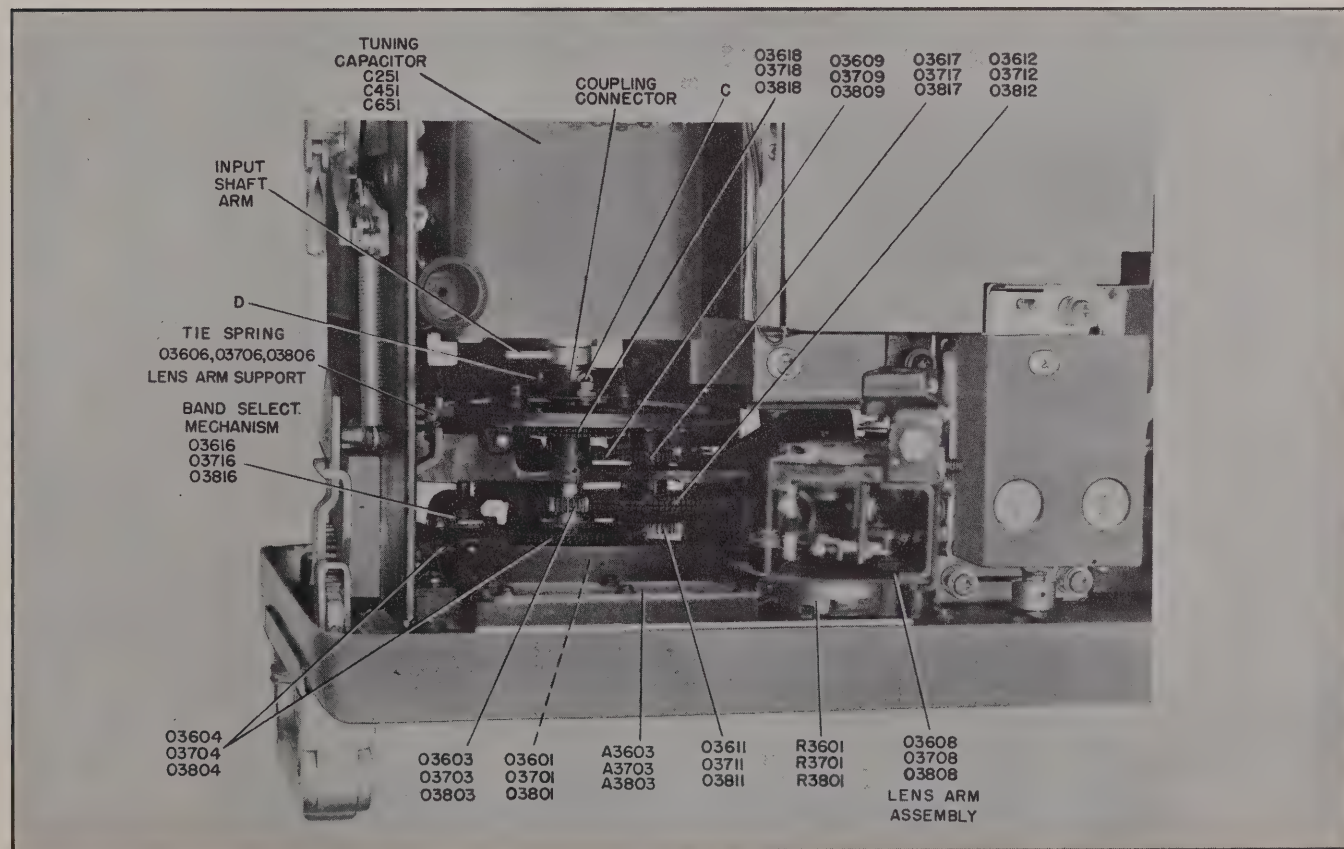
Dial Mechanism and Lens-Arm Assembly, Lifted, Top View
